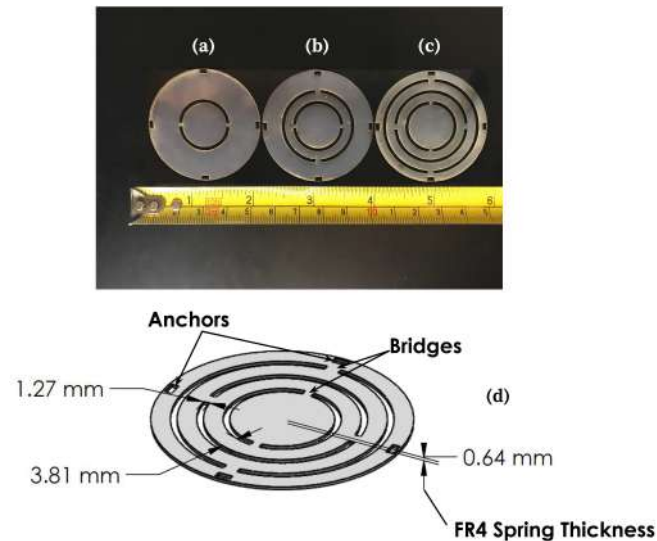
FR4 planar springs used in the EEH design: a) First FR4 spring design, b) Second FR4 spring design, c) Third FR4 spring design, and d) Dimensions and geometry.
